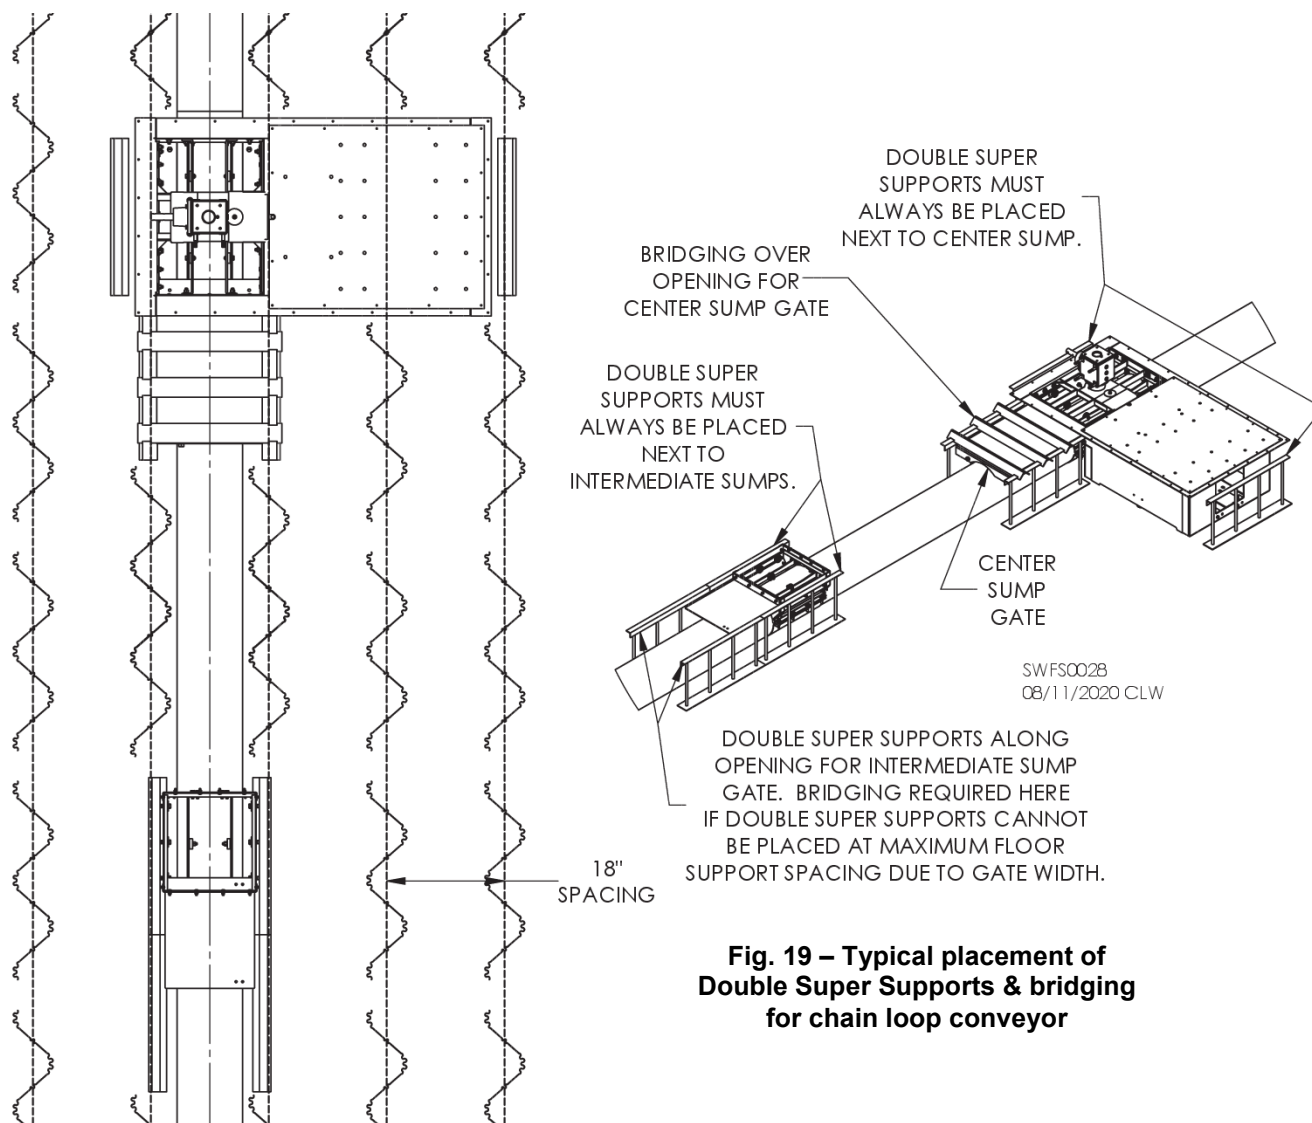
Typical placement of Double Super Supports & bridging for chain loop conveyor
